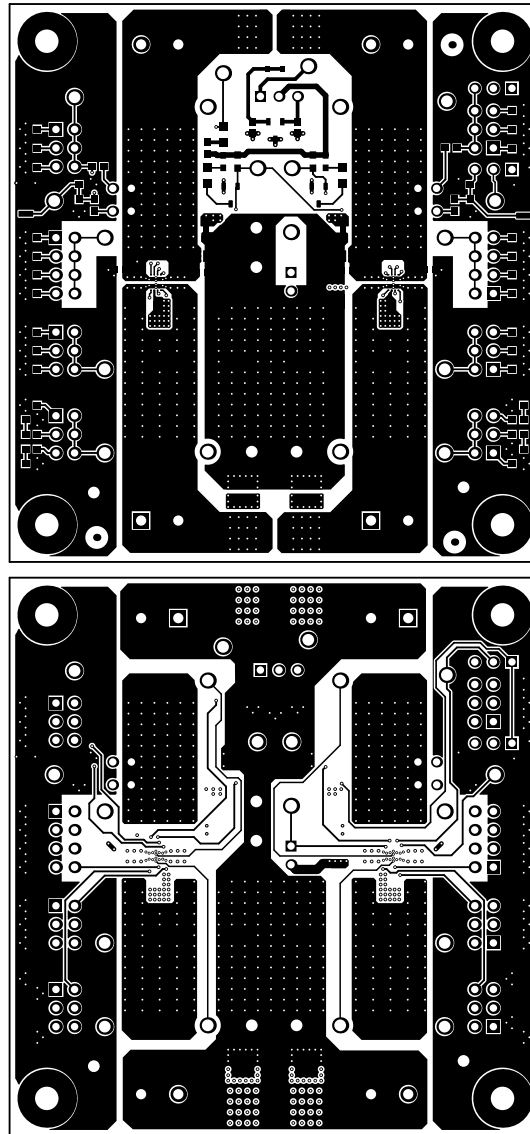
TPS25948EVM Board (a) Top Layer (b) Bottom Layer
